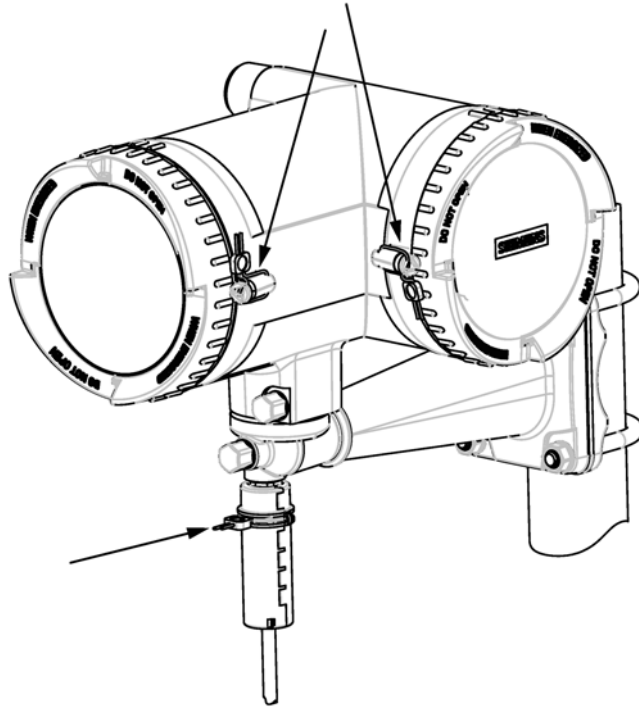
Remote transmitter seals in place - M12 plug variant. Arrows indicate the seal points of the two lock screws and cable sealing
